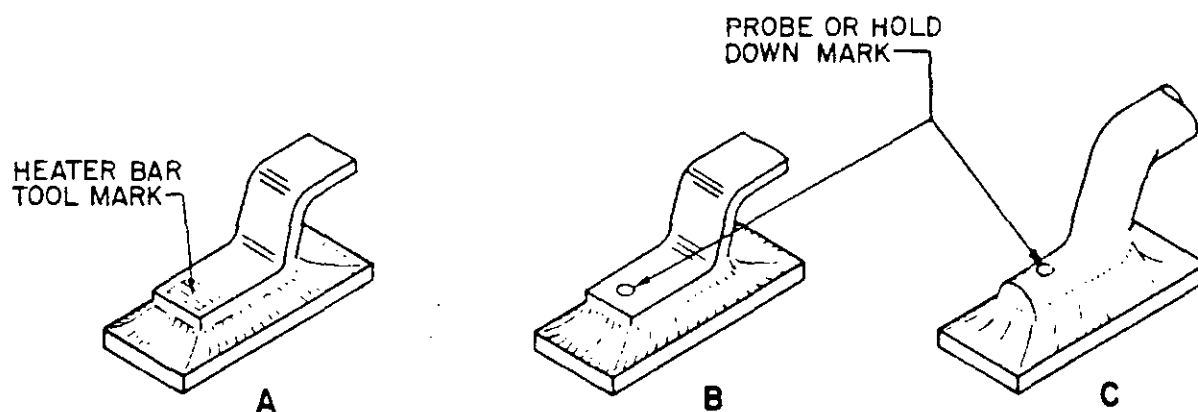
Planar mounted device tool marks (see 5.7.13).
